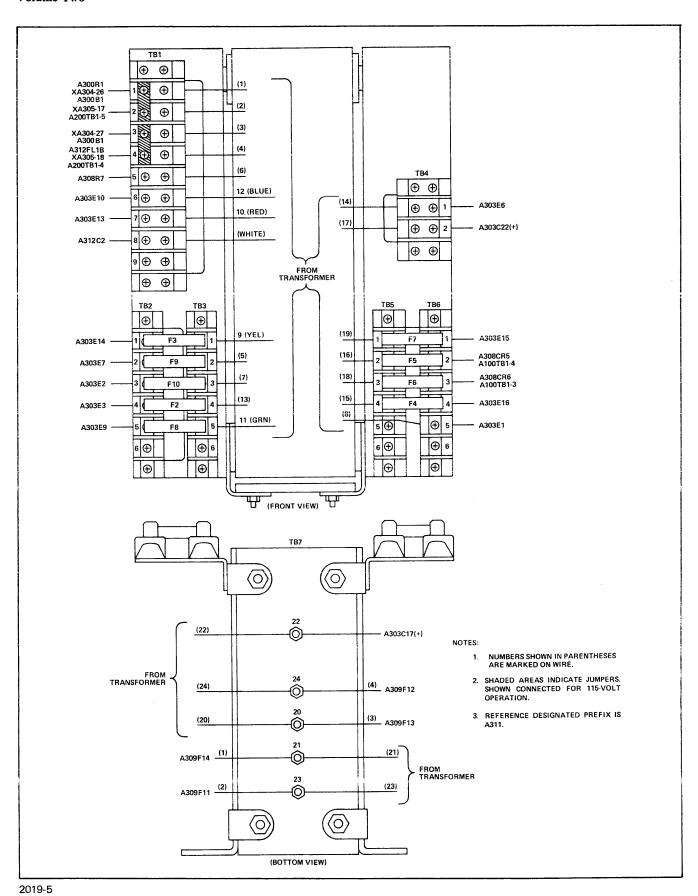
A311 Transformer Assembly, Parts Location and Connection Diagram
